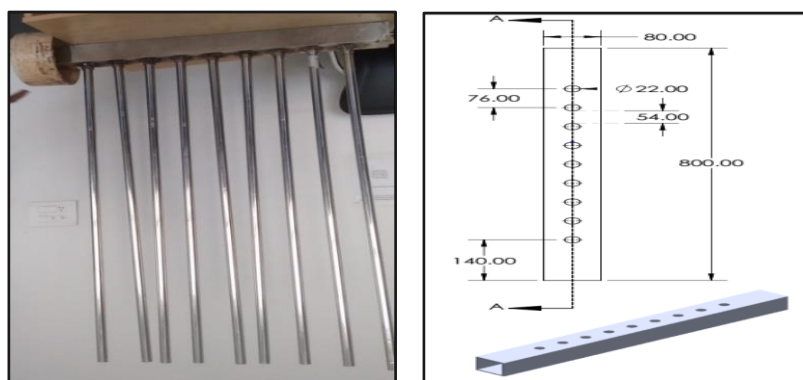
Shows the Inner Square bar manifold channel fitted in the main header
